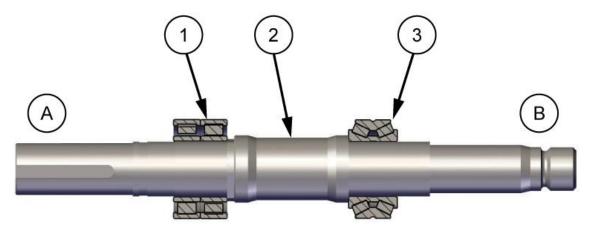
Fitting Drive End and Impeller End Bearing Assemblies.
